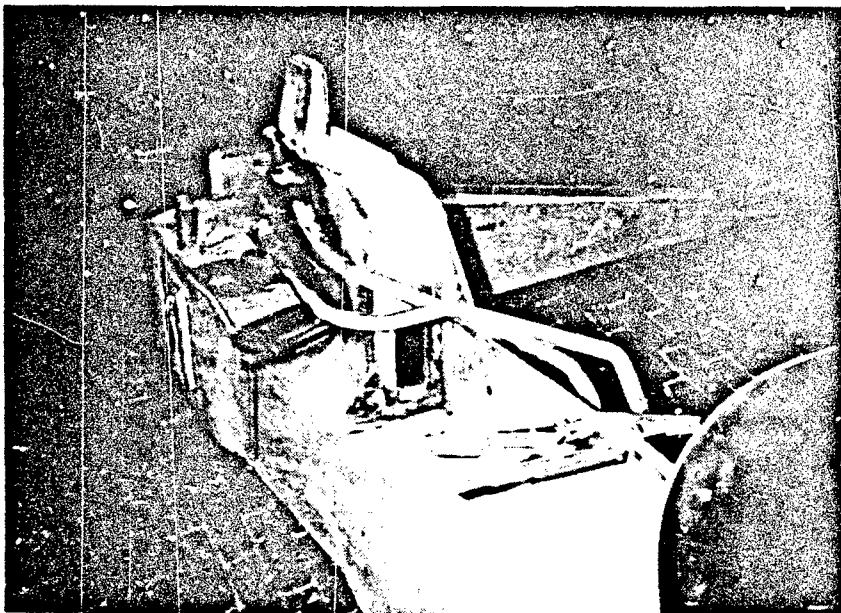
The fuel tank was removed so that the LHS mounting brackets could be bolted to the frame
